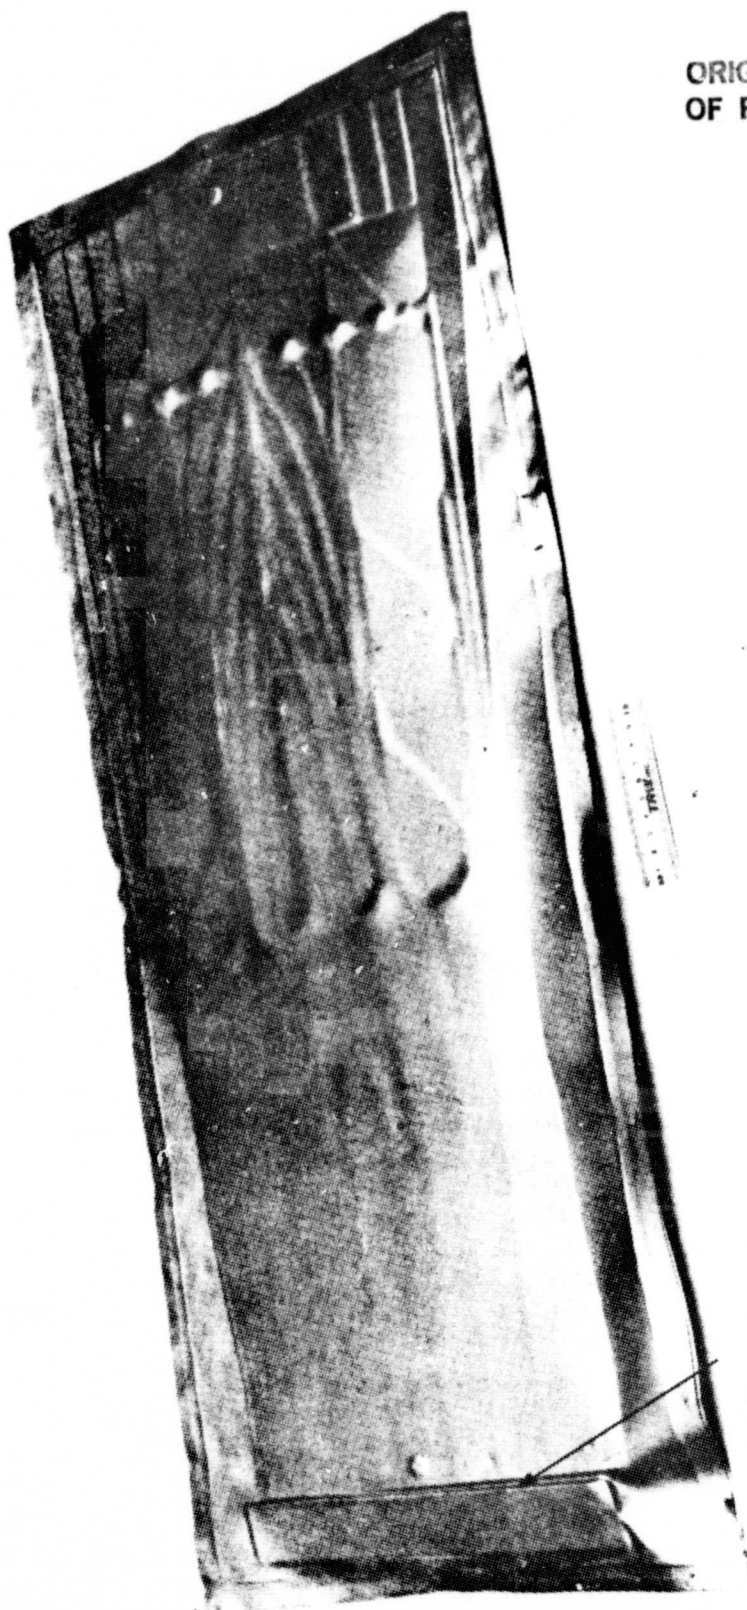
Closeup of Root End of HIP Blade Illustrating Location of Weld Failures.
